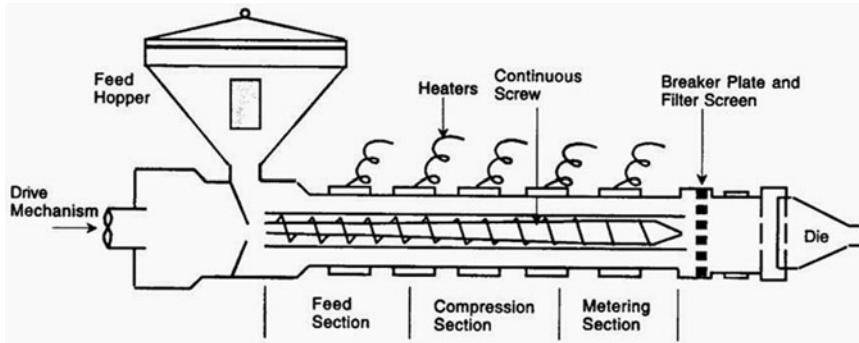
Cross-Section Diagram of a Horizontal Single-Screw Extruder.
